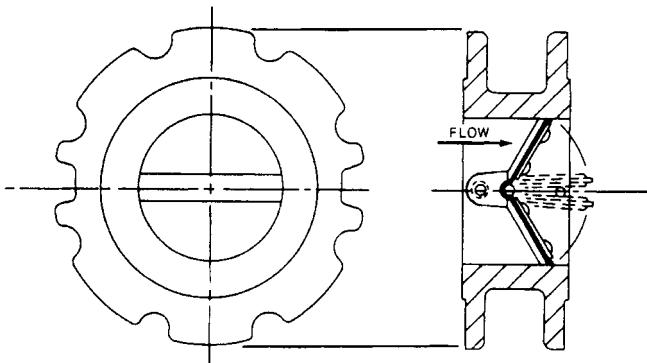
Check valve. (Courtesy Spencer Turbine.)
